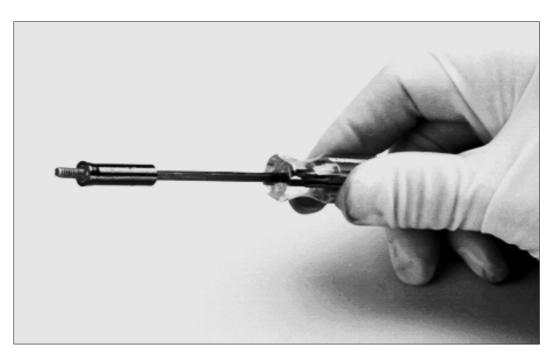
Correct Arrangement of Machined Sleeve on Allen Driver
